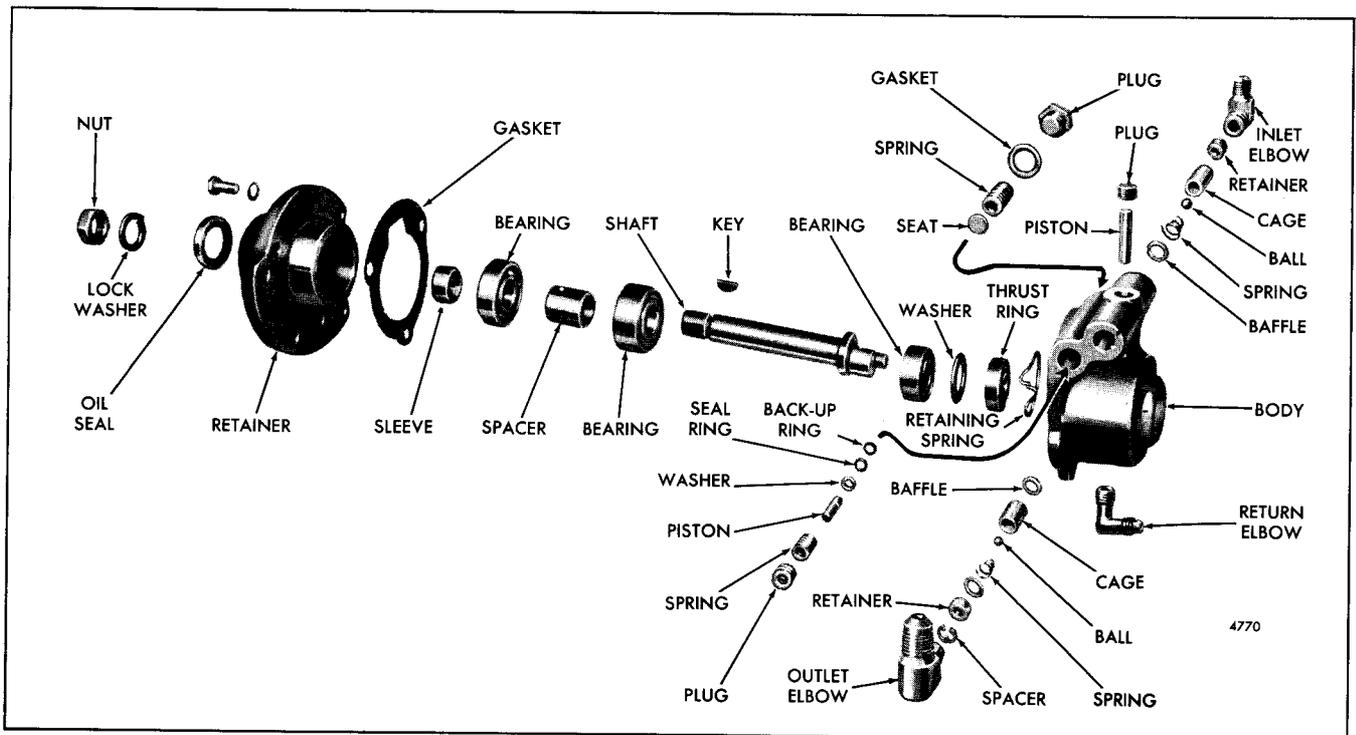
Belt-Driven Charging Pump Details and Relative Location of Parts
